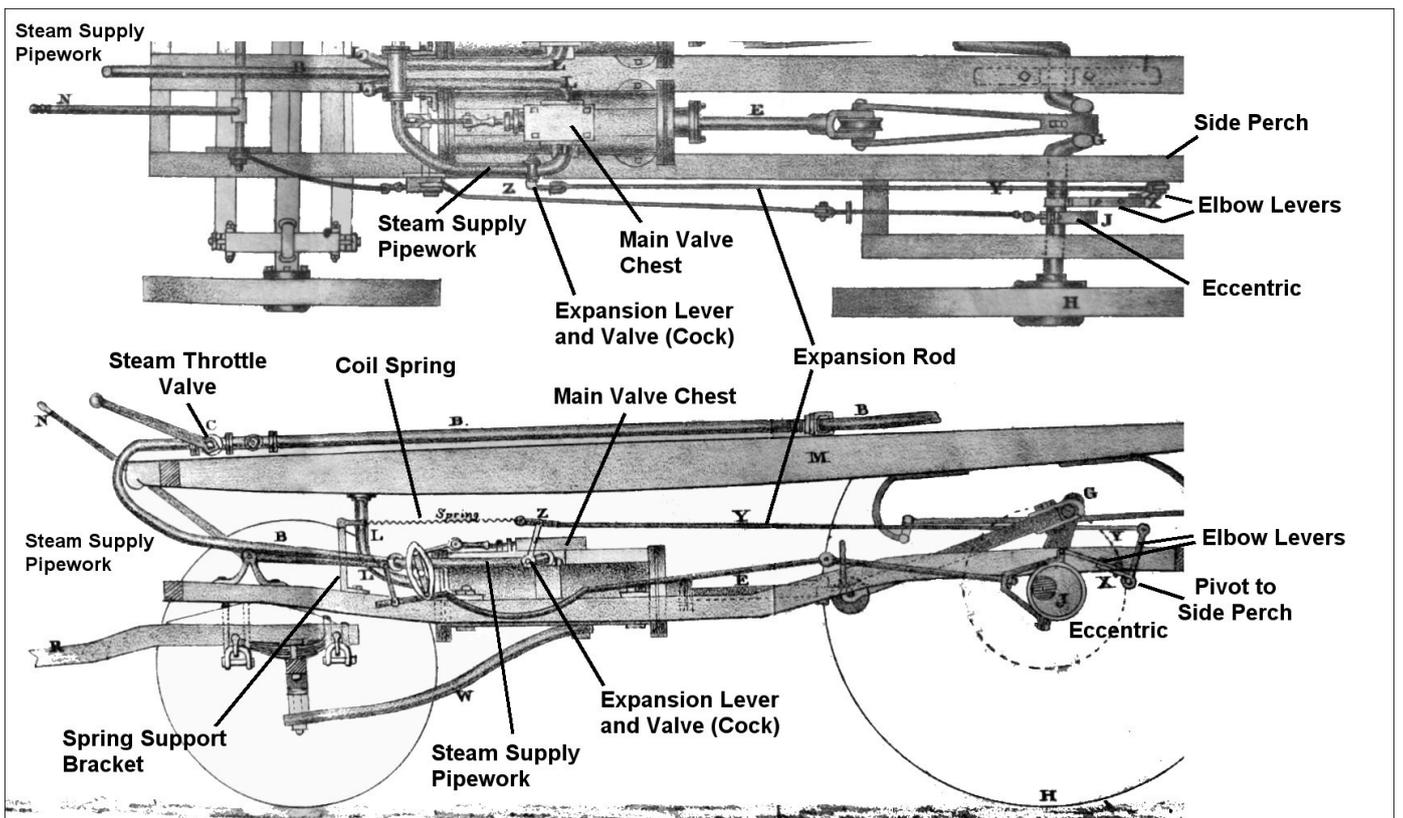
Plan and elevation of Gurney's coach of 1826 showing the details of the expansion valve (cock) and the method of actuating the valve from elbow levers at the crankshaft. A coil spring, attached to a support bracket on the side perch, is used to return the valve to the off position. Gordon reference 31 with added text.
